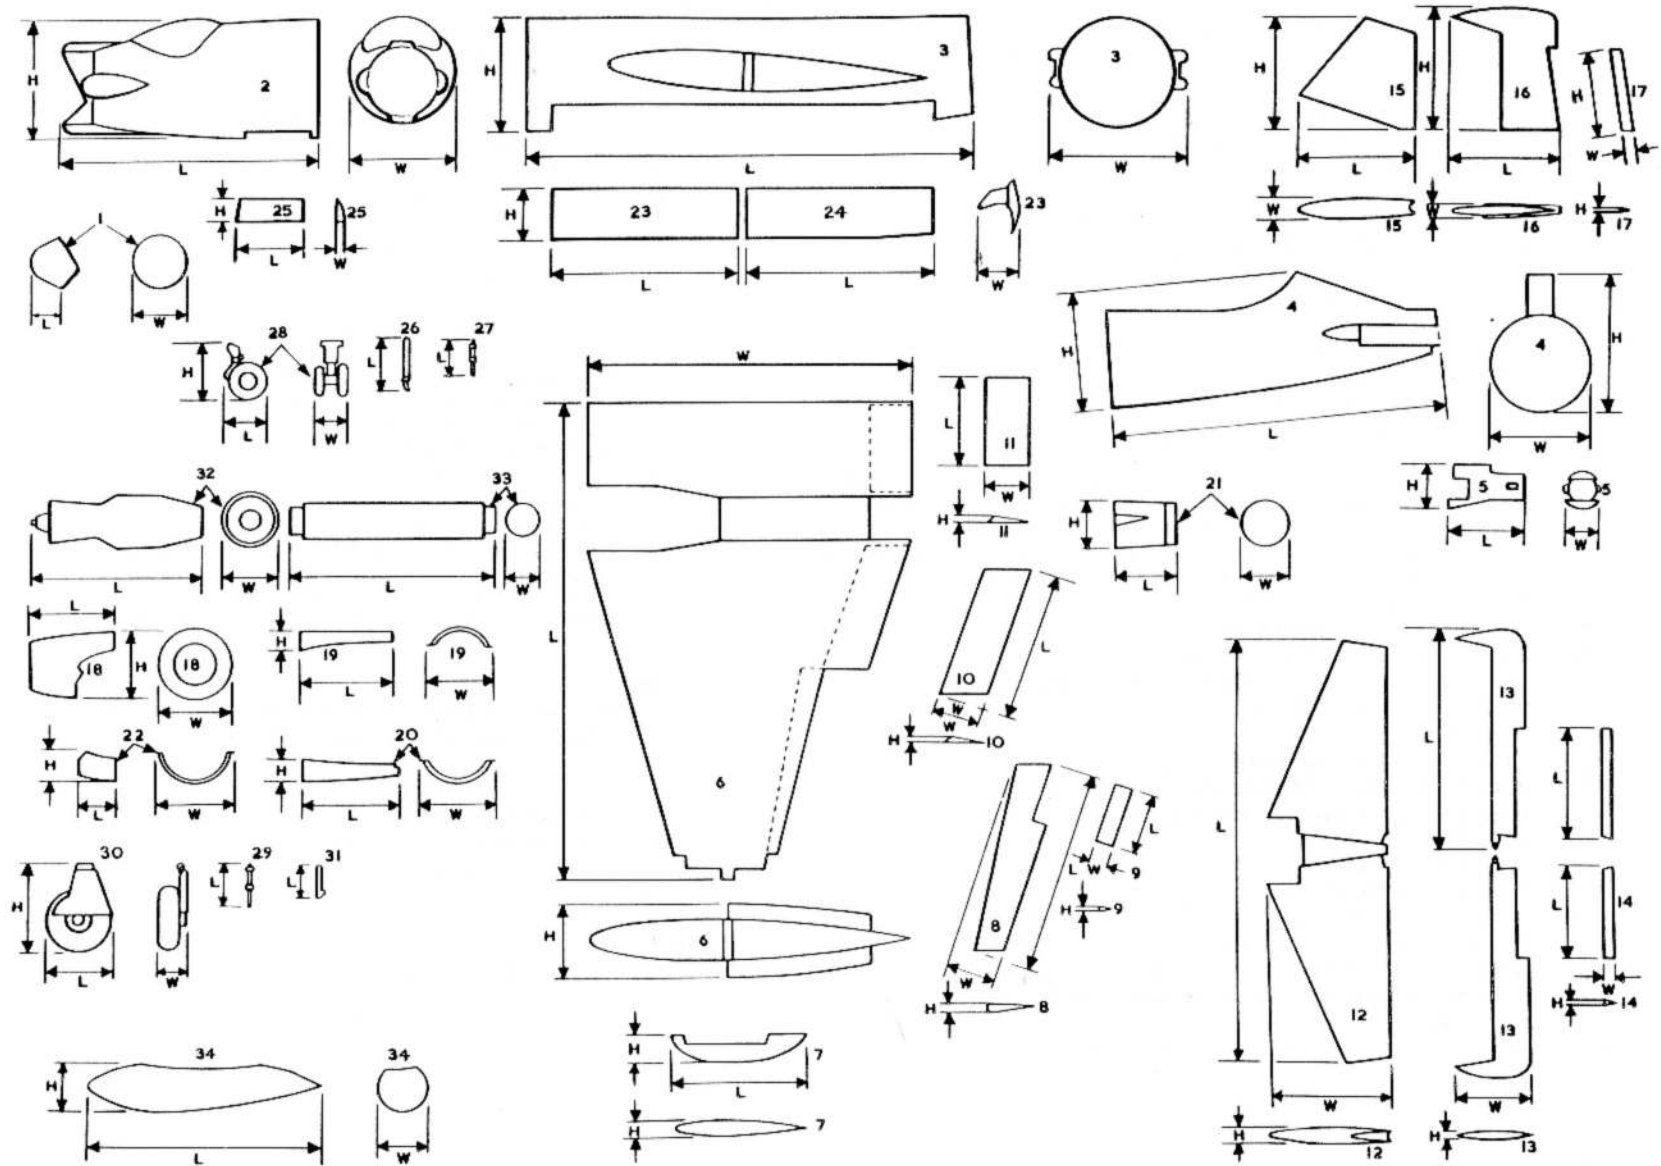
COMPONENT WEIGHTS AND DIMENSIONS
